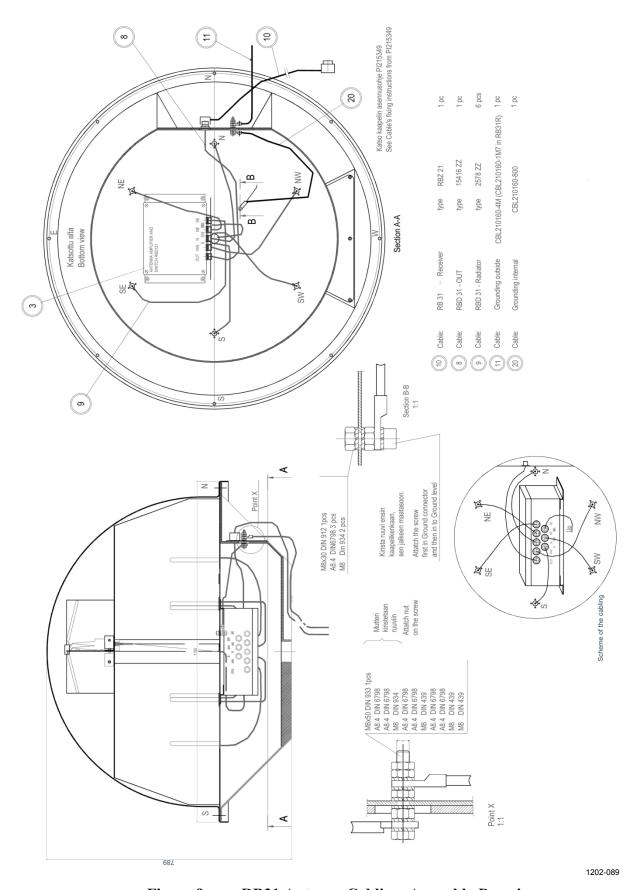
RB31 Antenna Cabling, Assembly Drawing
